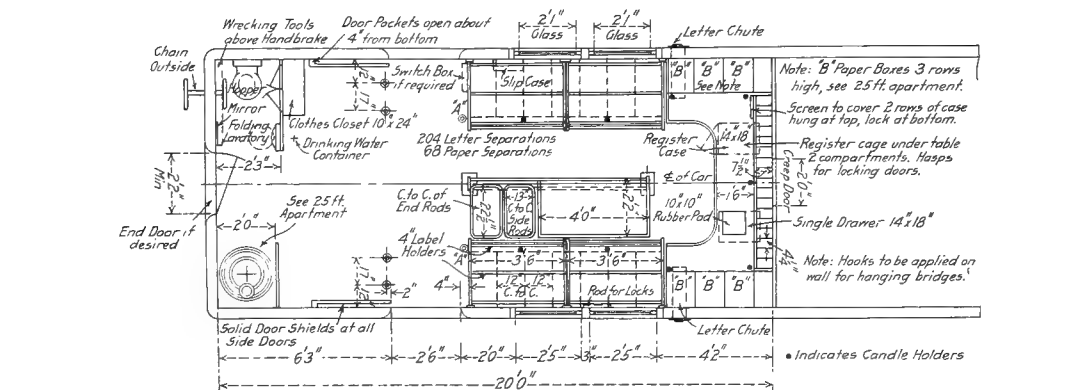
Floor Plans Showing U. S. Government Requirements for 20 ft. Mail Apartment.
